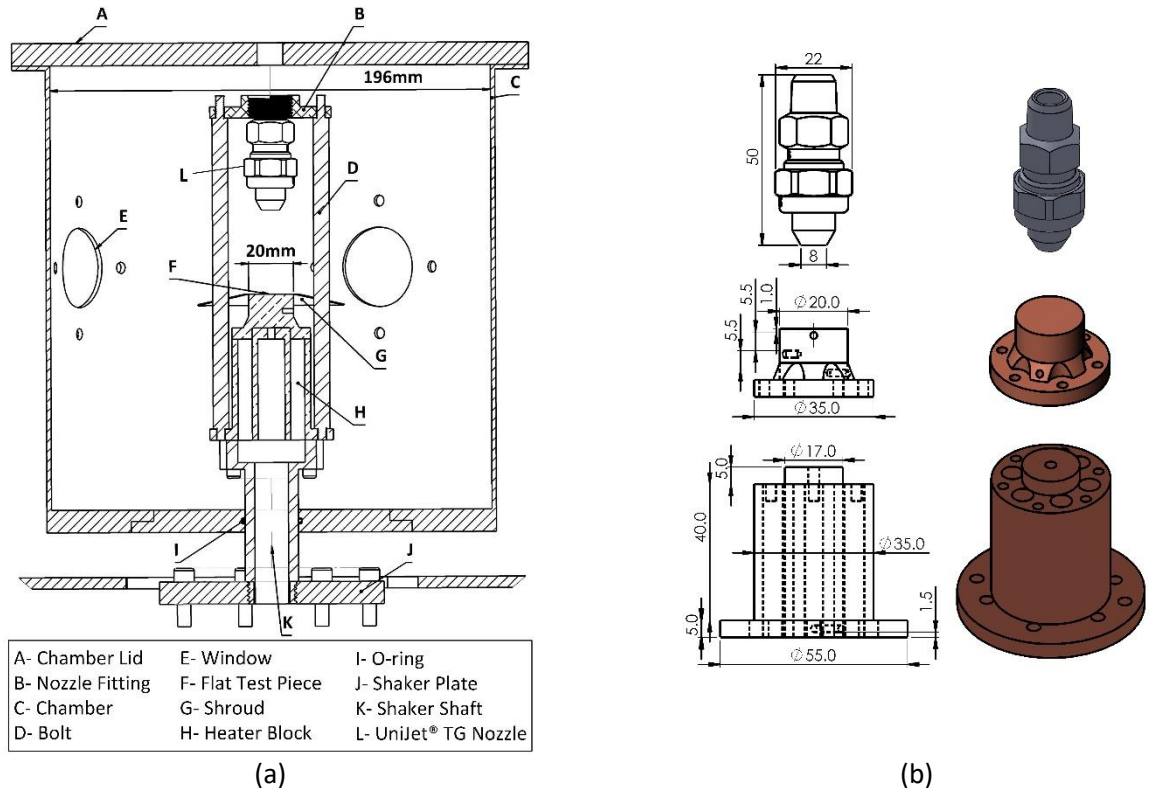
Flat surface test-piece: (a) Chamber cross-section view, (b) From top to bottom, exploded view of Unijet® TG Nozzle, flat surface test piece and heater block (based on [18]).
